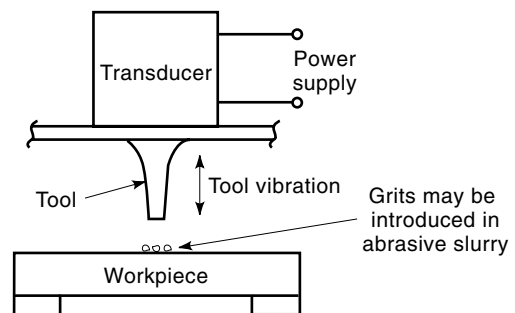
In ultrasonic grinding, motion of the grinding grits is perpendicular to the surface of the workpiece.
